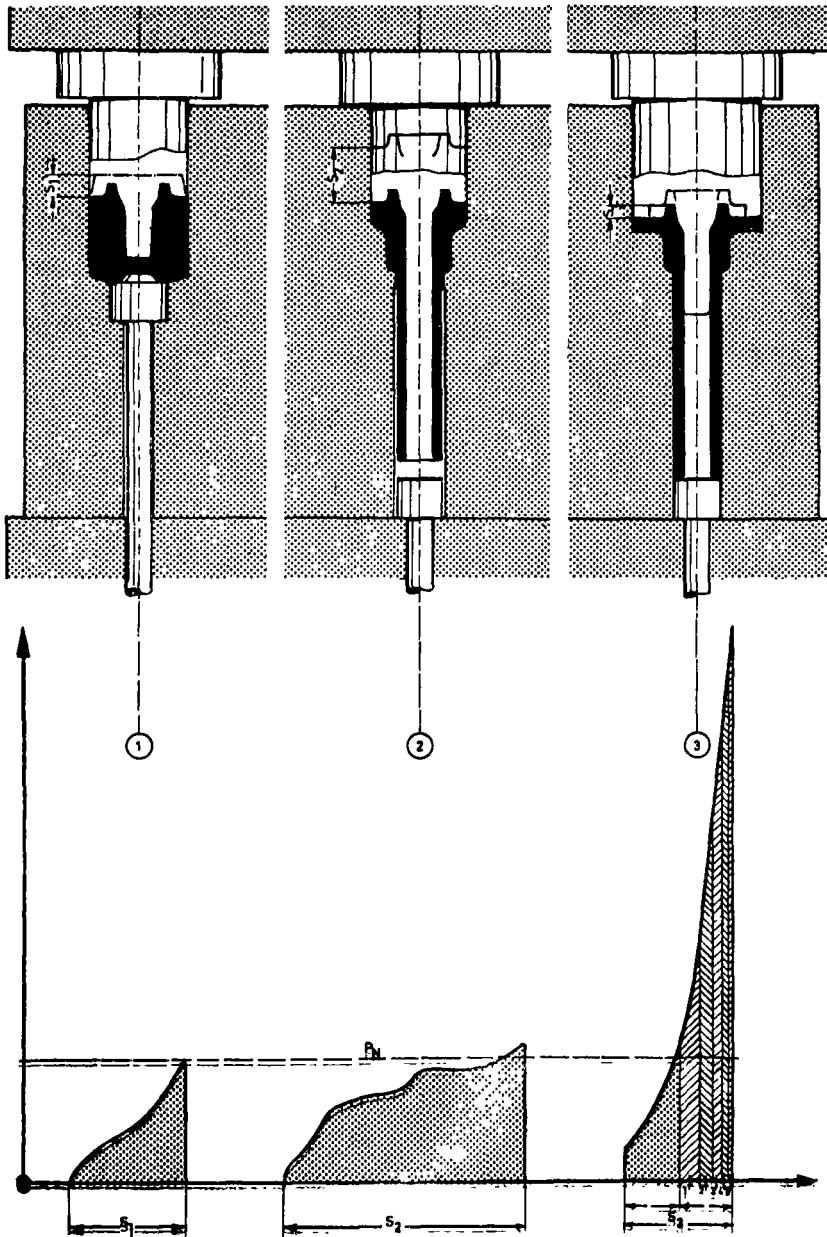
Production setup for producing parts on Clearing Hermes pneumatic-mechanical forging press. Upper and lower platens move in this press, allowing workpiece to absorb full impact.
